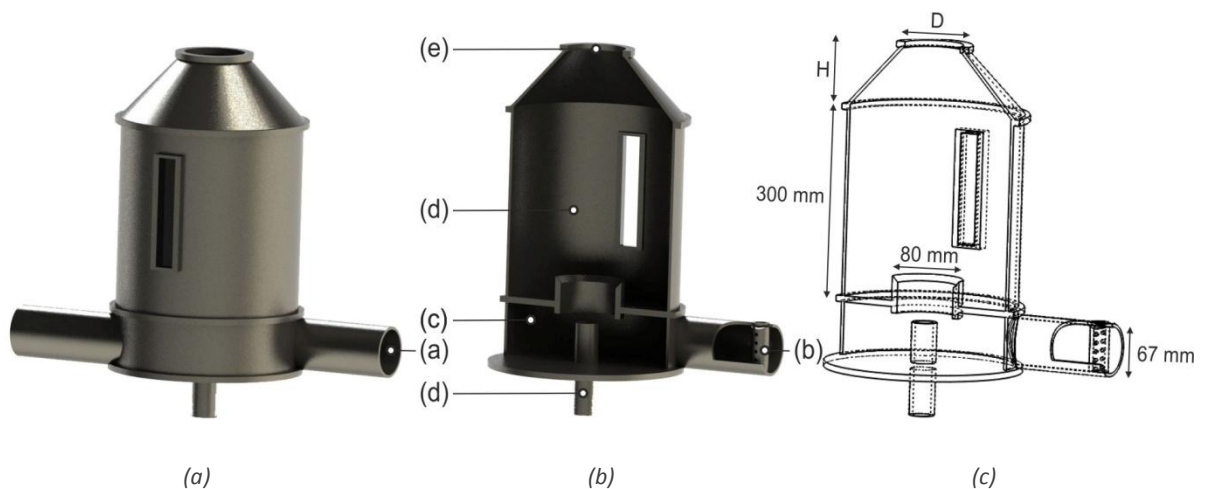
(a) External view, (b) sectioned view and (c) wireframe of the laboratory-scale 100 kW burner
